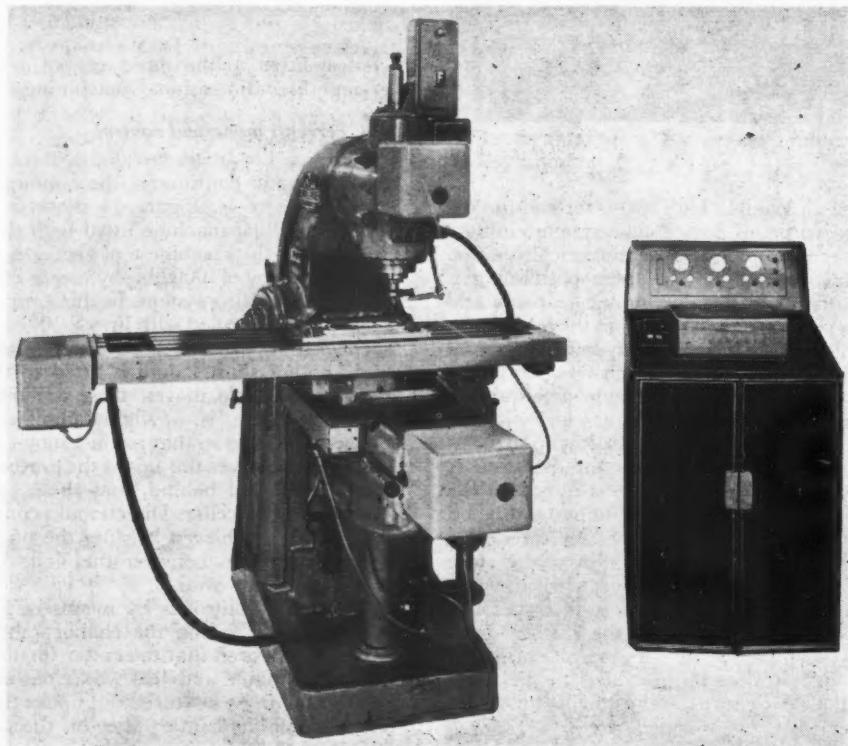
A Kearney & Trecker milling machine fitted with the Ferranti three-dimensional numerical control
